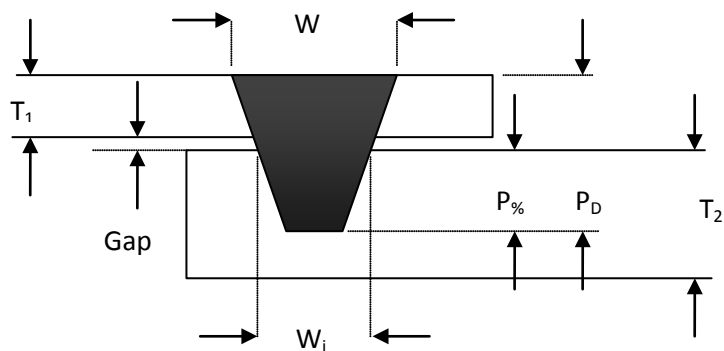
Schematic: Longitudinal weld section showing undercut and drop-out
